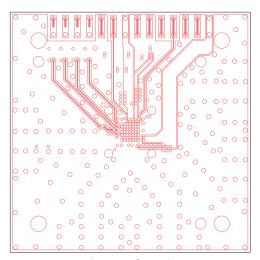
SKY65366-21 Evaluation Board Assembly Diagram
